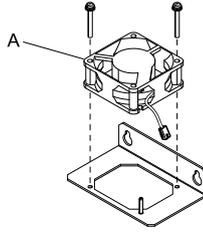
Remove the Circuit Board Cooling Fan Unit
